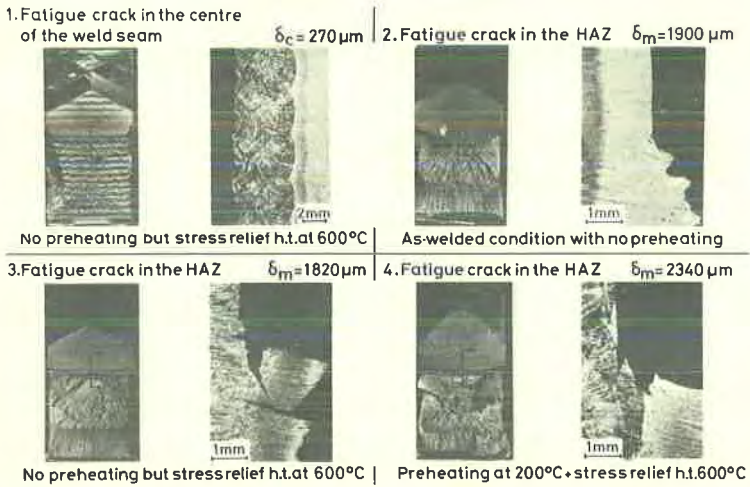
Fracture surfaces from Narrow-Gap welded COD-specimens and sections showing the zone of the first crack advancement
